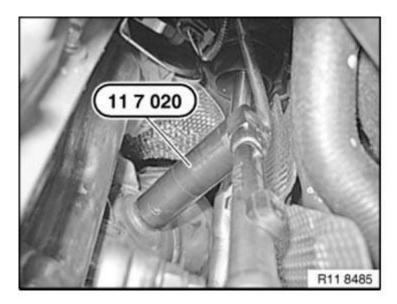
Releasing Control Sensor Using Special Tool 11 7 020
